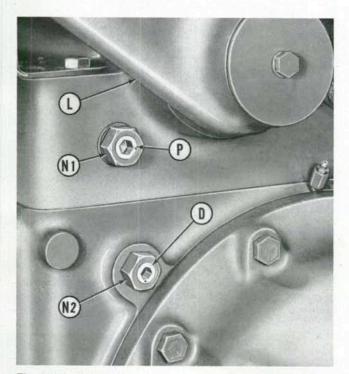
View showing location of position control eccentric pin (P) and draft control eccentric pin (D) at right rear corner of lift cover and rear axle center housing.
